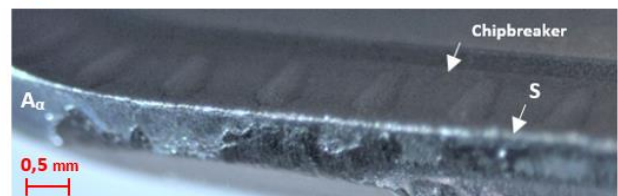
Cutting edge of DP End Mill After 24 Passes.
